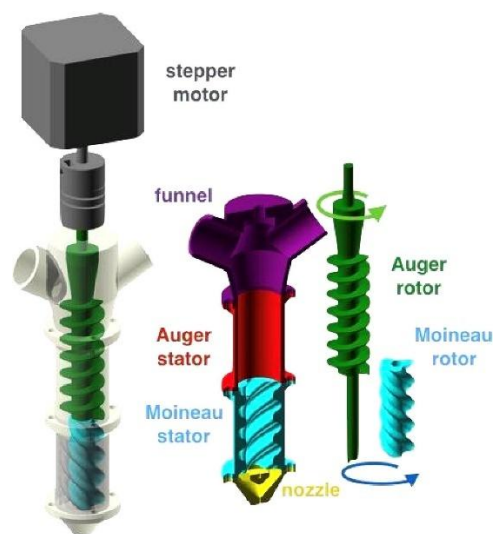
Schematics of a pellet extruder, combining together Auger and Moineau screws [90].
